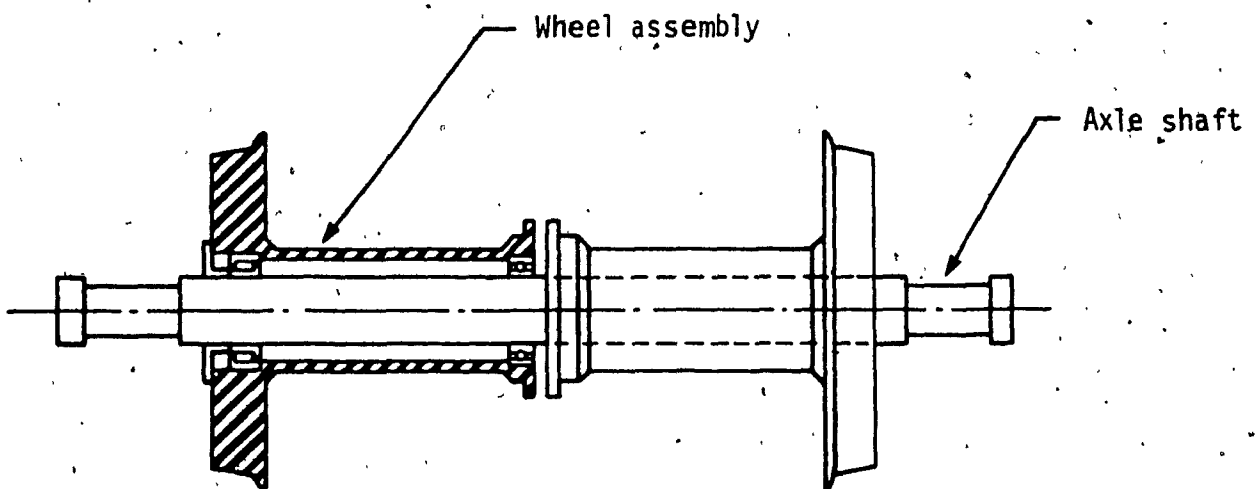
Wheelset assembly for IRW system with single axle [96].
